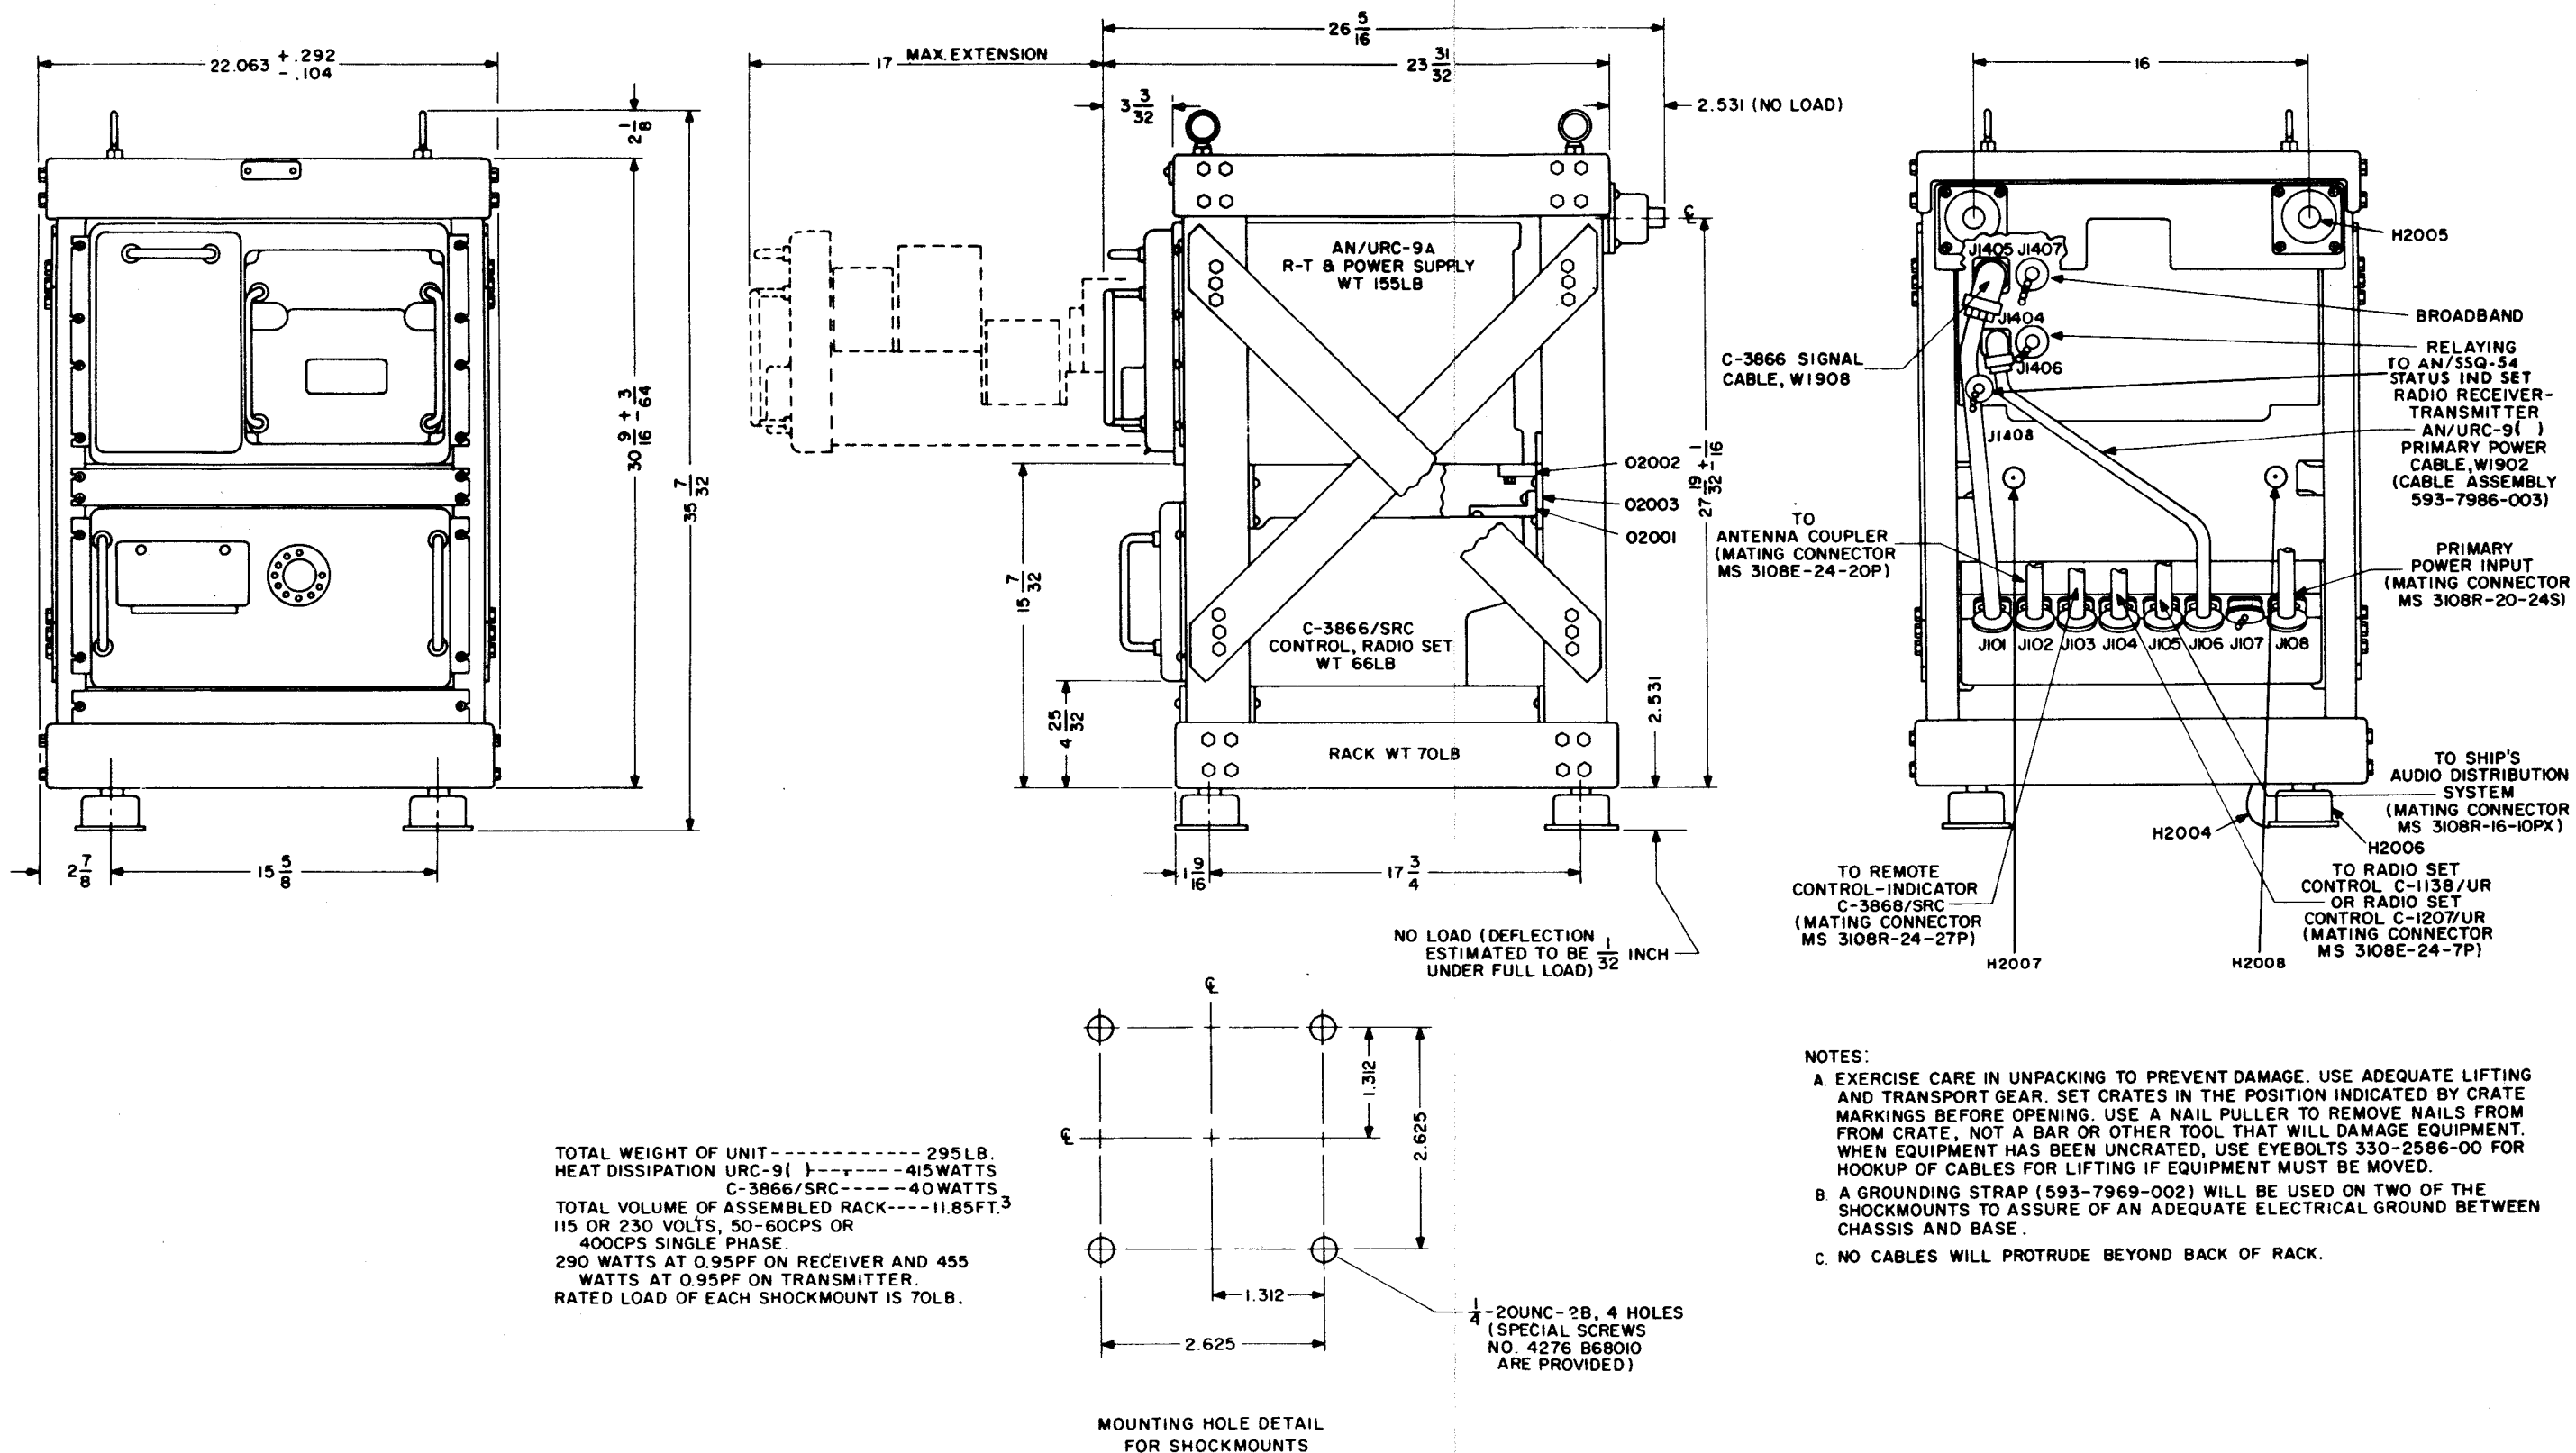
Radio Set AN/SRC-21( ), Outline and Mounting Dimensions
